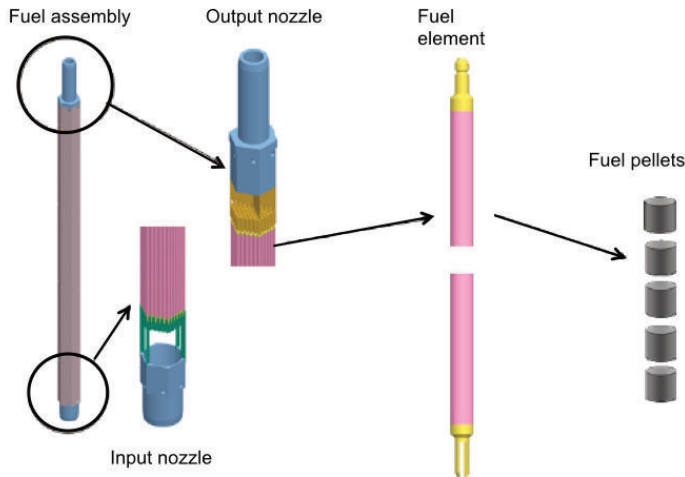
The MYRRHA-FASTEF fuel assembly design ©SCK•CEN.
